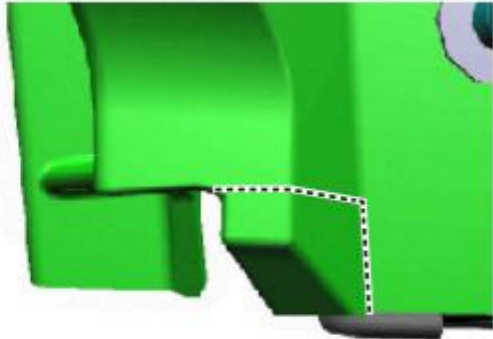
Showing the lower foam seal correctly pulled back and tucked out of the way. Right side shown, left side similar.
